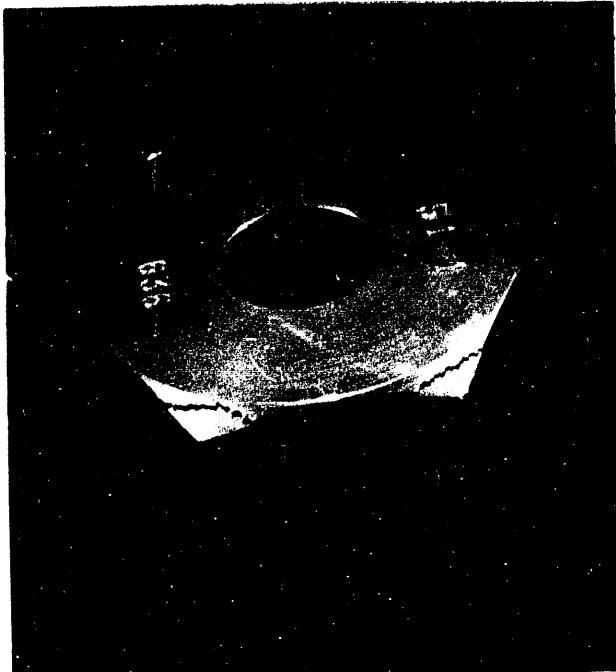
Stress corrosion failure of cylinder valve packing nut.
